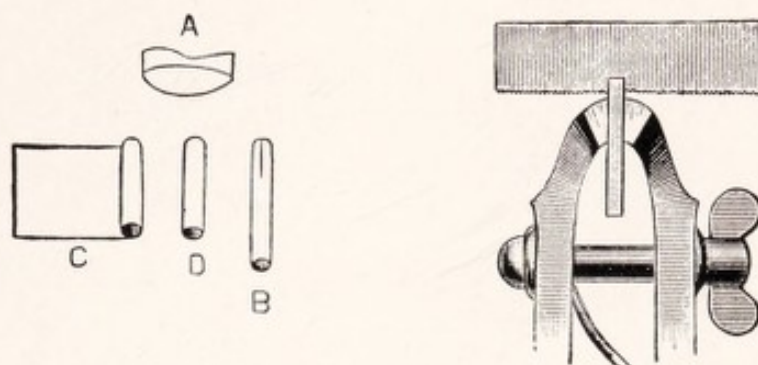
Details for the construction of a spring post attachment to be used with a tube. An early attachment for removable bridgework
